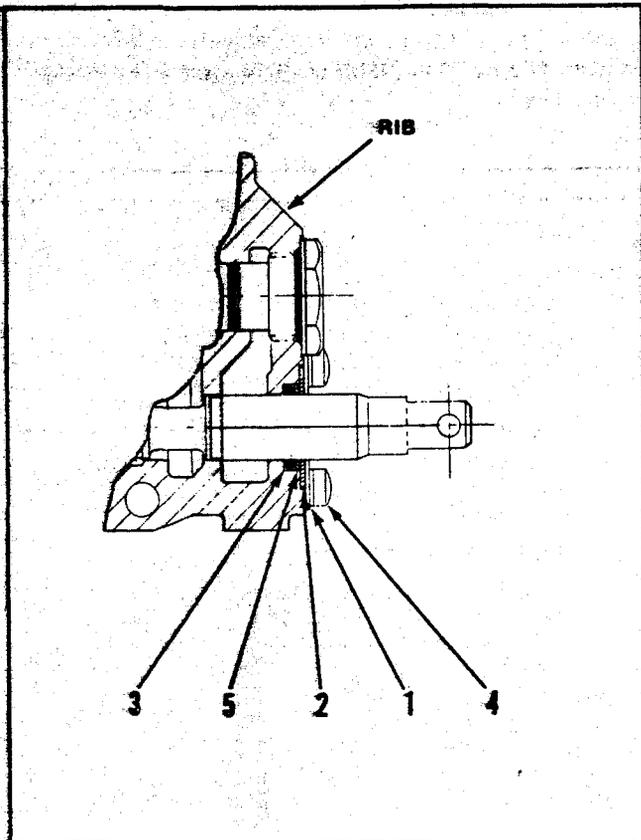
Spool Seal Assembly After February 1, 1973.
